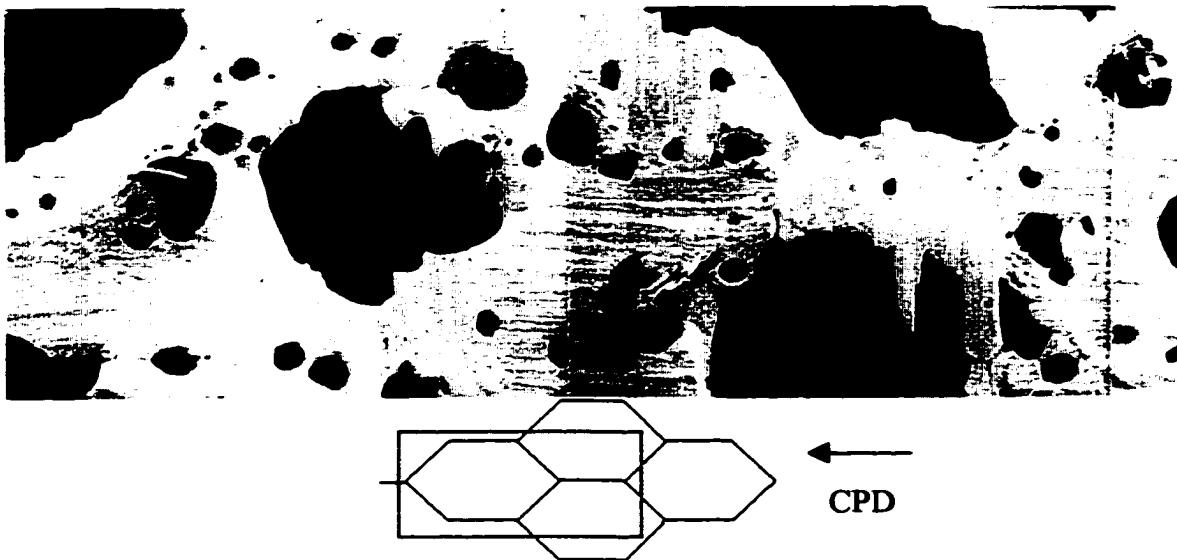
Fracture surface of thermoplastic modified epoxy and fractured carbon fiber remaining on the Nomex honeycomb core after drum peel testing (magnification @ 21.4X). (CPD) Crack propagation direction.
